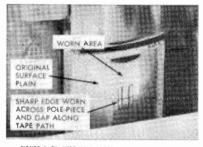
EXAMPLE OF IMPROPERLY POSITIONED HEAD EXHIBITING WEAR PATTERN
